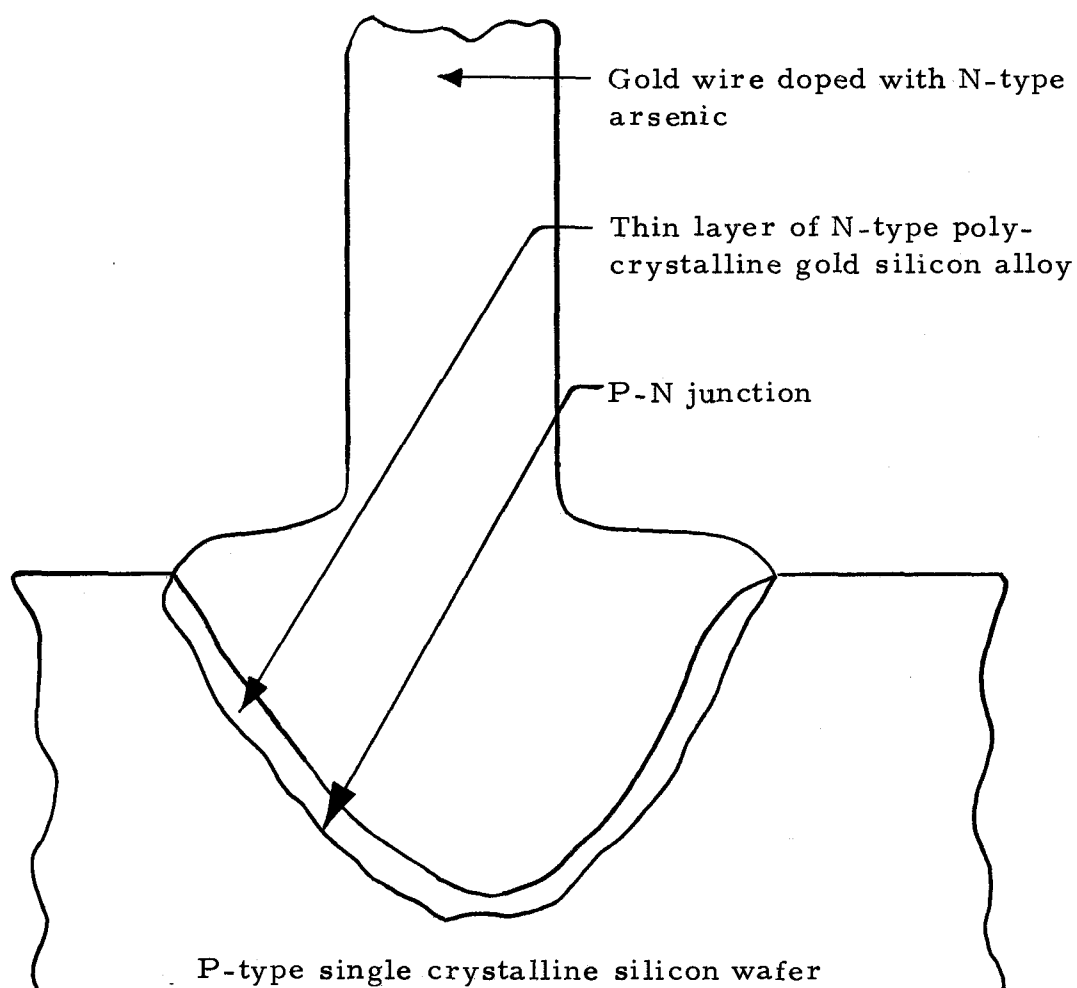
(a). Thin layer of gold silicon alloy after welding.
